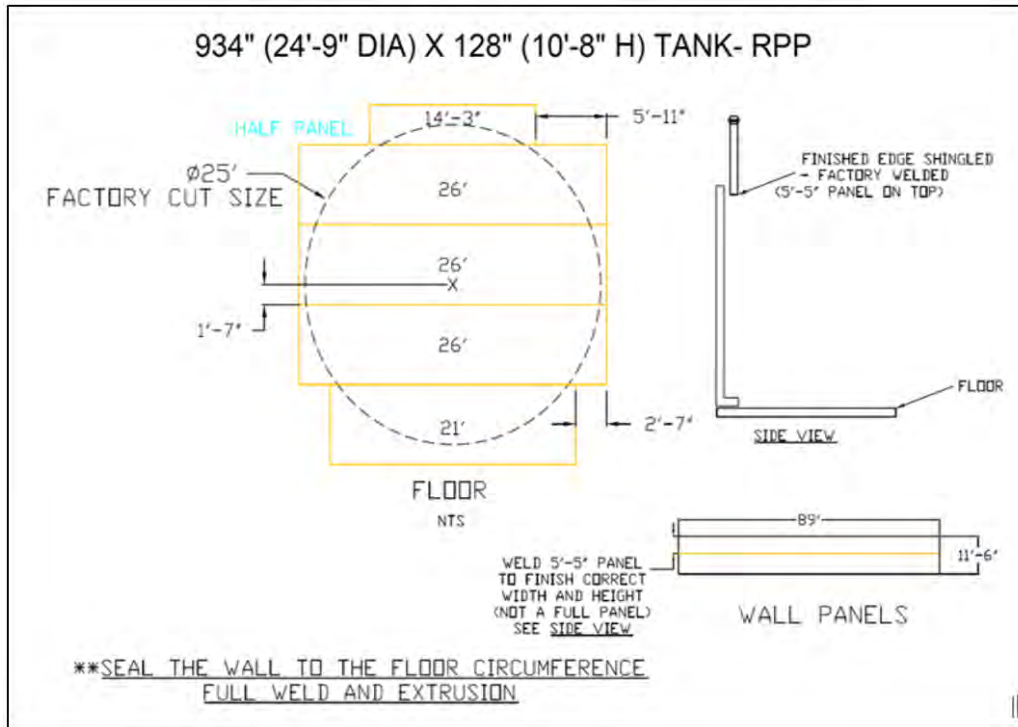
Typical wall section for AST, photo courtesy Western Tank and Lining
